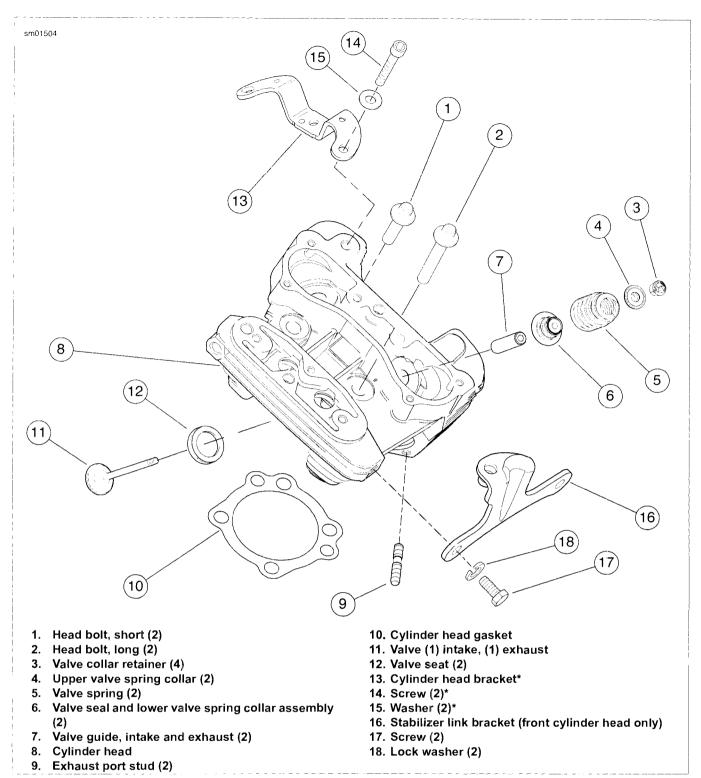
Cylinder Head Assembly (* side mounted horn)
